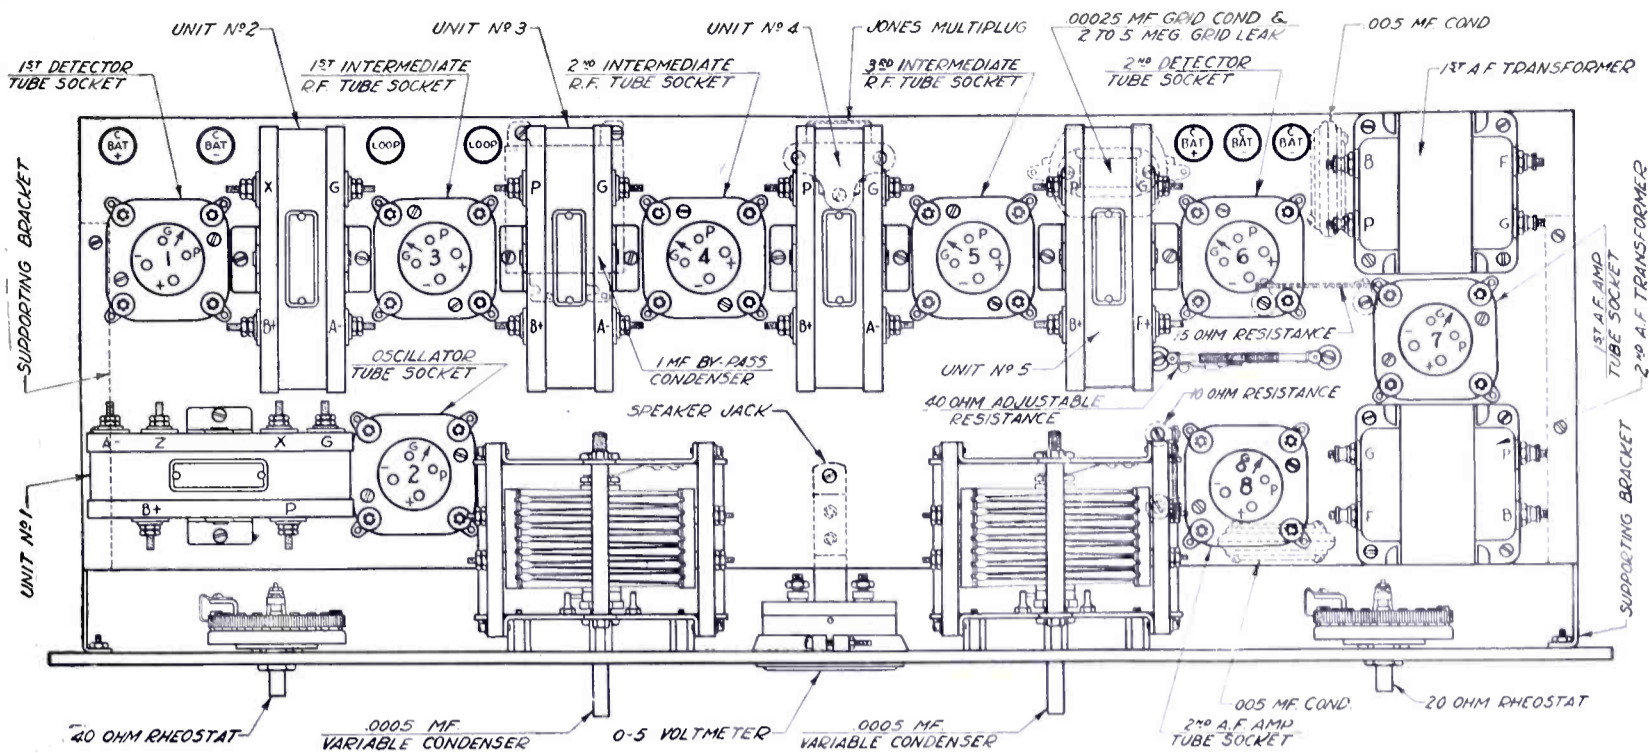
Top view of receiver showing arrangement of parts on sub-panel
